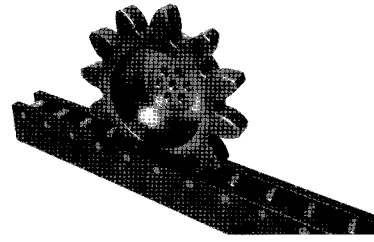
Photograph of pin-pinion gear used cycloid tooth profile
